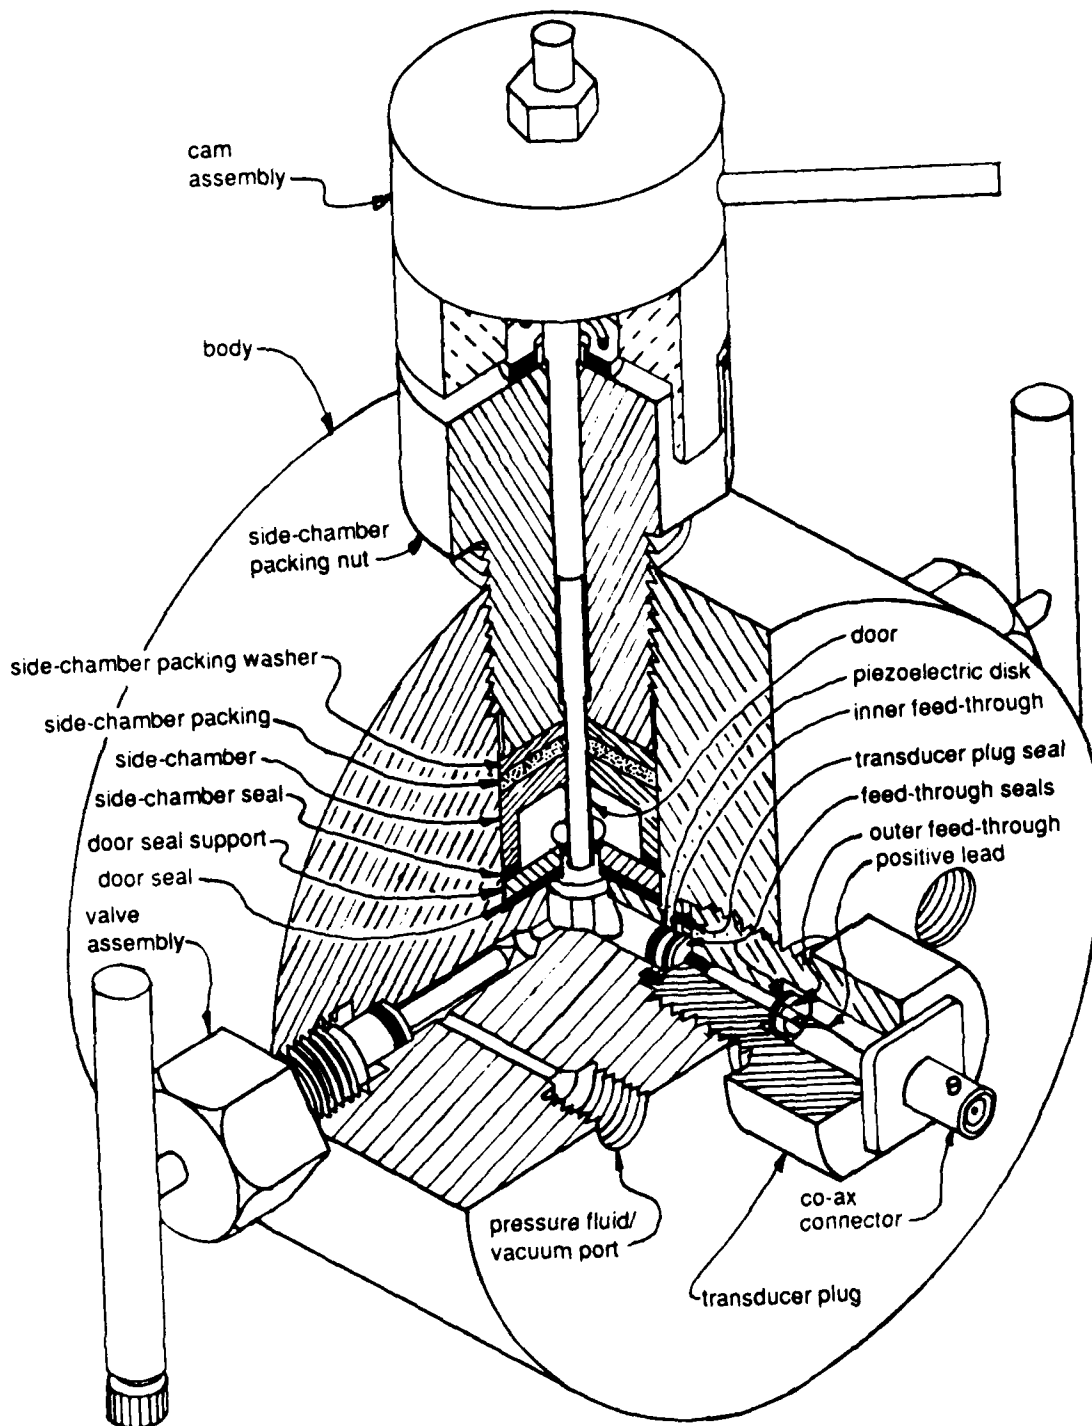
ISOMETRIC VIEW OF ASSEMBLED CHAMBER. THREE-QUARTERS SCALE.
